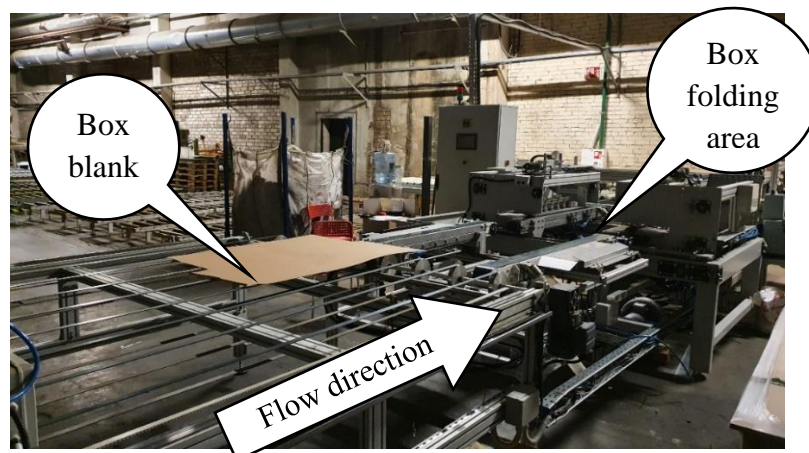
Layout of JSC “Baltic Furniture Components” packaging line
